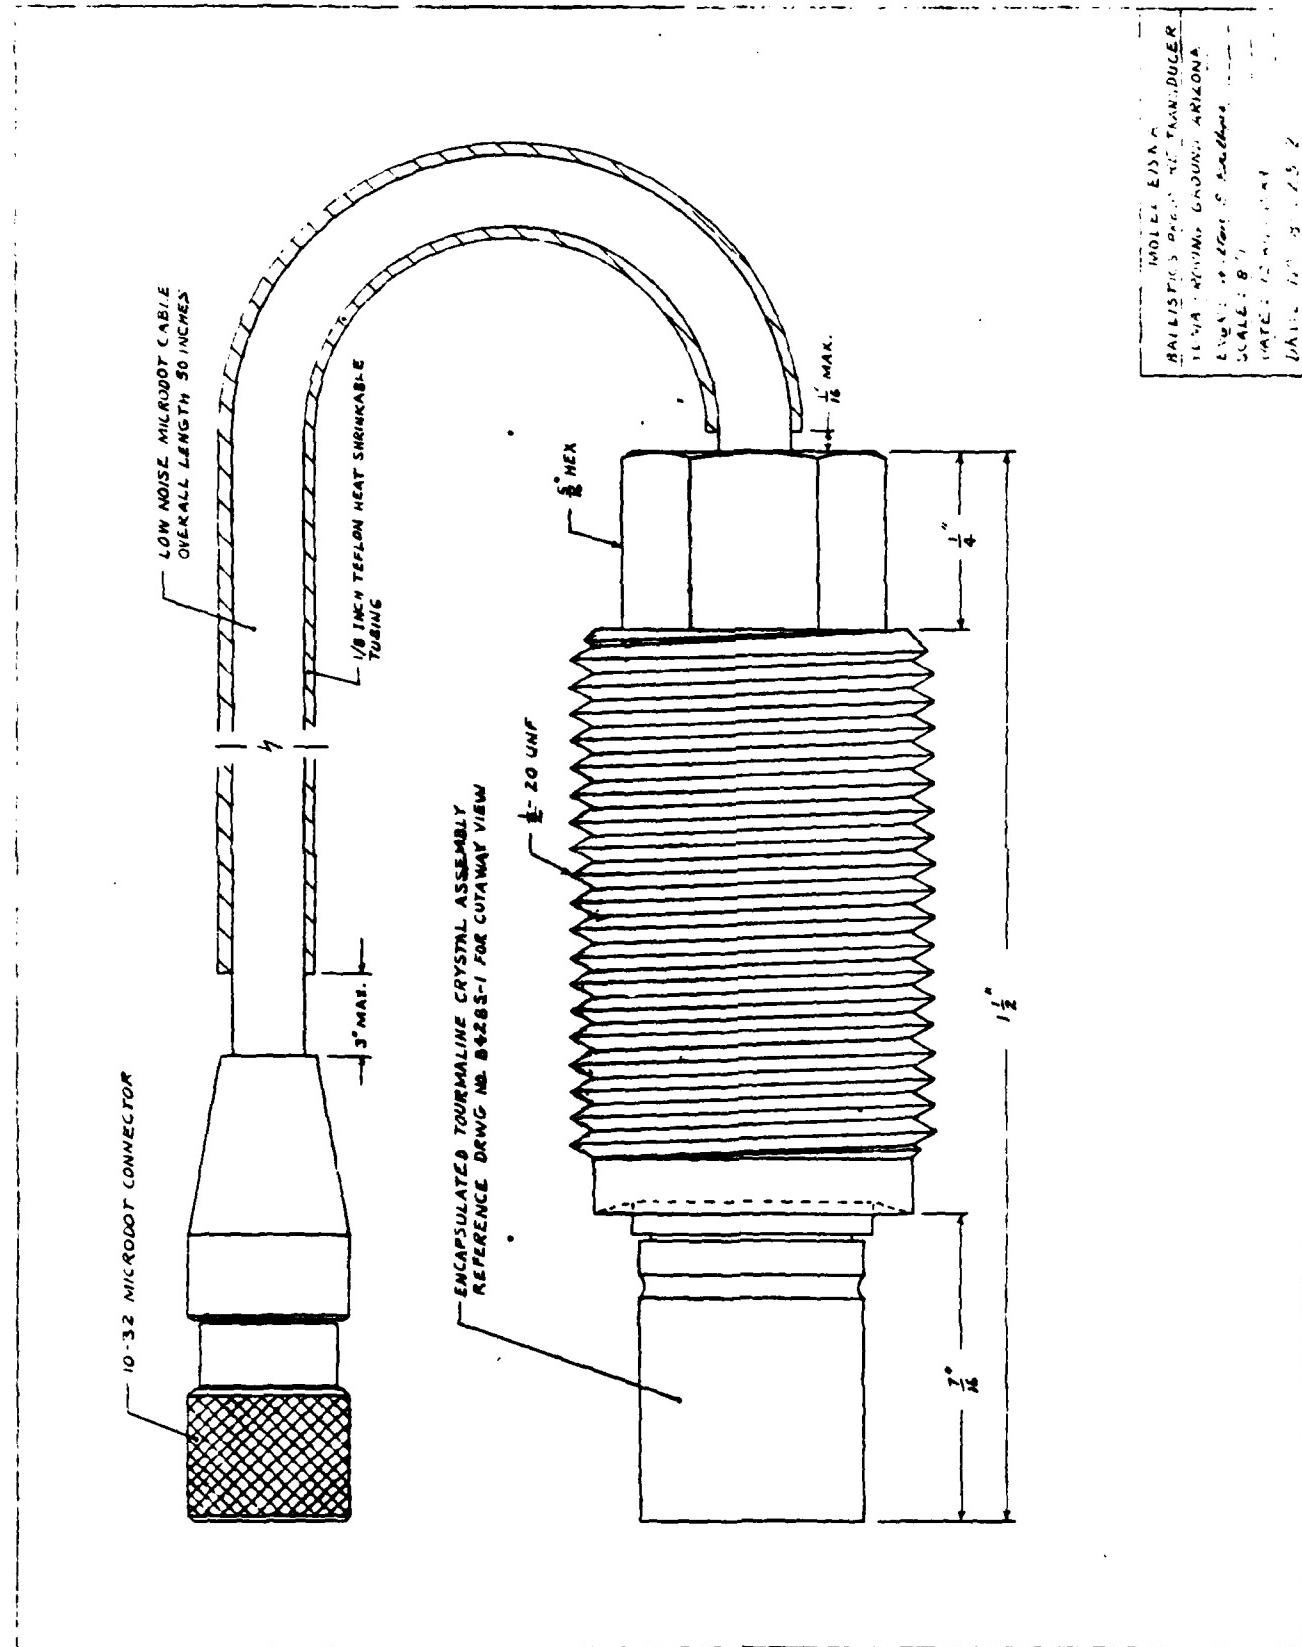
Assembly drawing of model E15MA pressure transducer.
